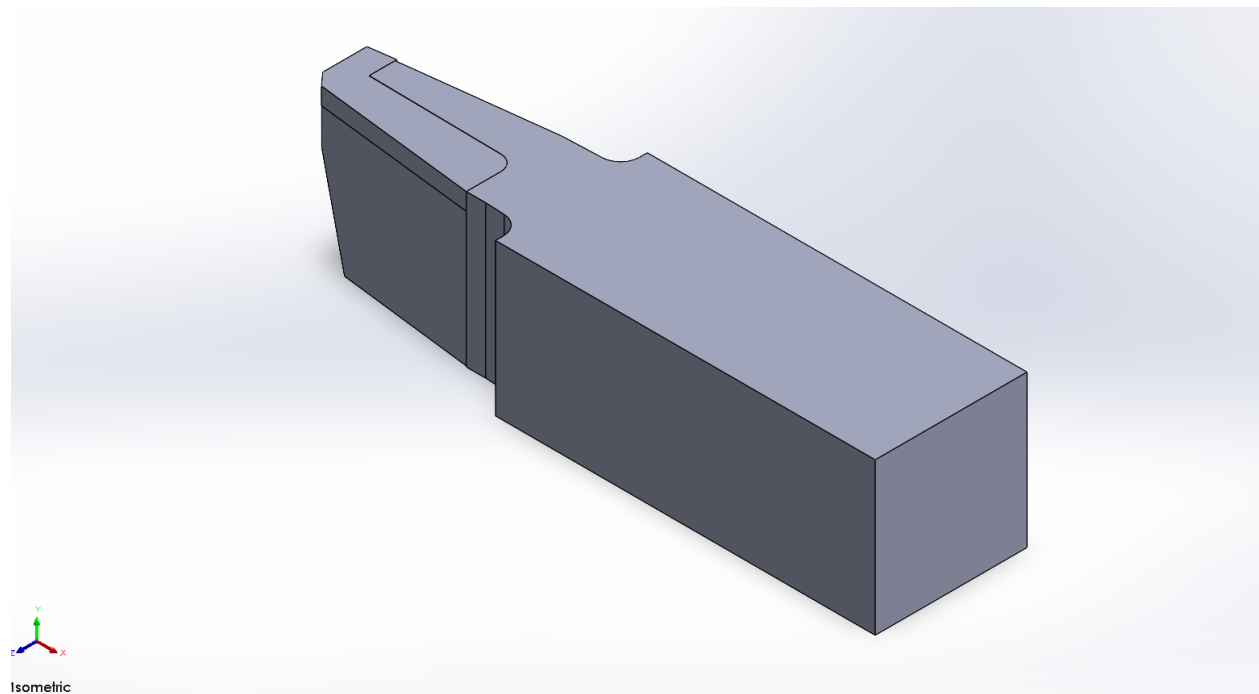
CAD Assembly of Profile tool holder and Cutting tool insert (LS)
